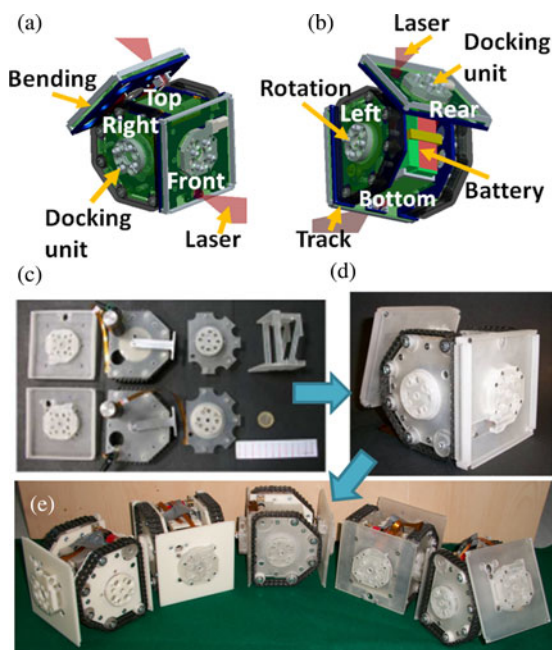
Scout robot: (a) front view of the CAD model, (b) rear view of the CAD model, (c) assembly of the robot, (d) robot prototype, and (e) five prototypes fabricated.
